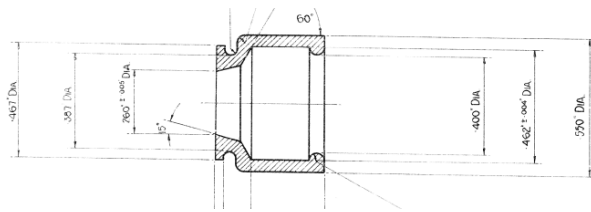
Valve stem oil seal AEG327.
